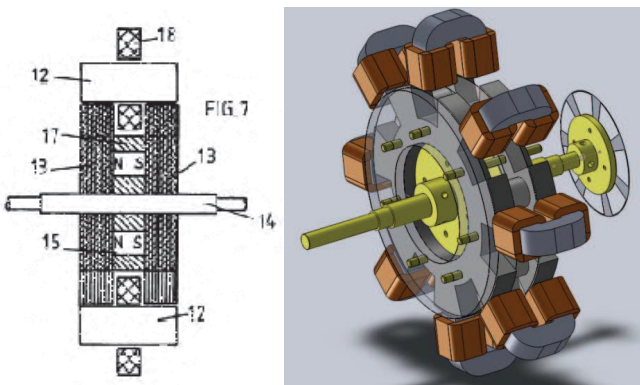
Structural view of the rotor from original patent (left). View of the rotor with stator cores fitted with coils connected in series (brown) and the commutating foil attached to the machine shaft (right).
